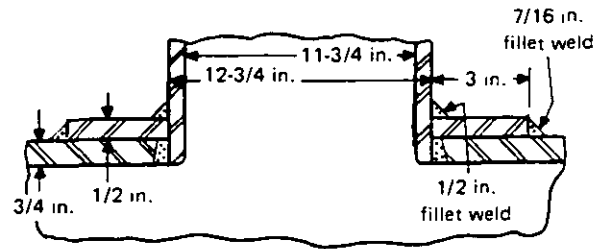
EXAMPLE OF REINFORCED OPENING
